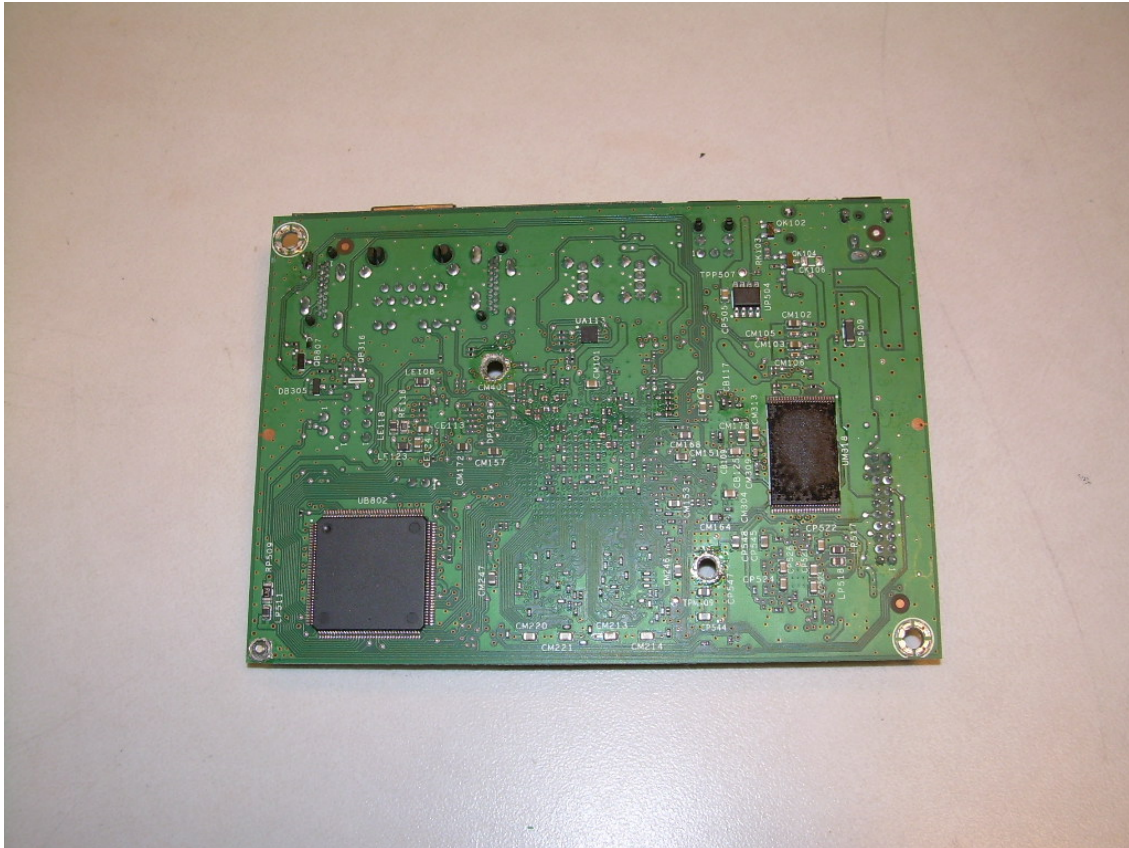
Top View of the Main PCB with Heatsink Removed
